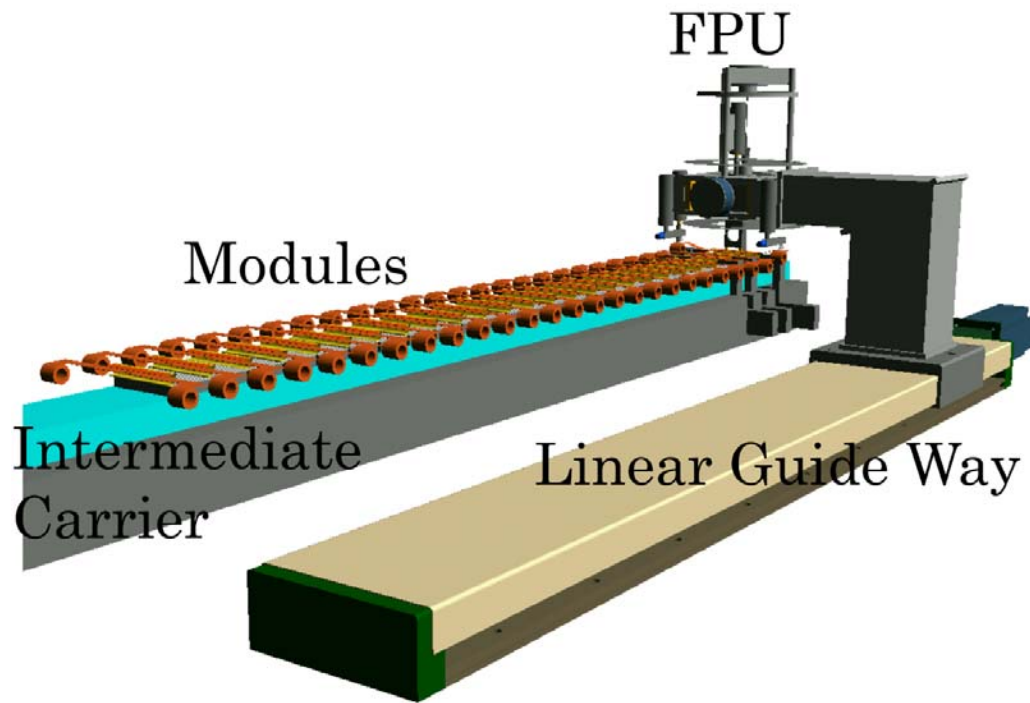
Overview of the proposed assembly machine with the linear guideway that carries the Fine-Positioning Unit (FPU) and the intermediate carrier with 26 modules with the ladder cables still wound up.
